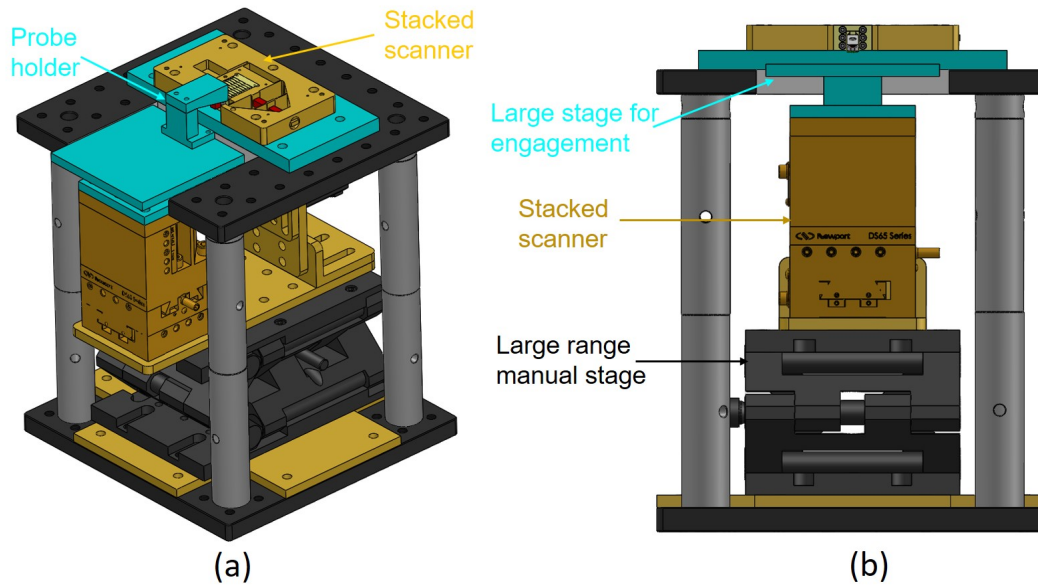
Multi-layer stacked scanner AFM CAD design: (a) isometric view of for sample scan configuration, (b) front view for probe scan configuration
